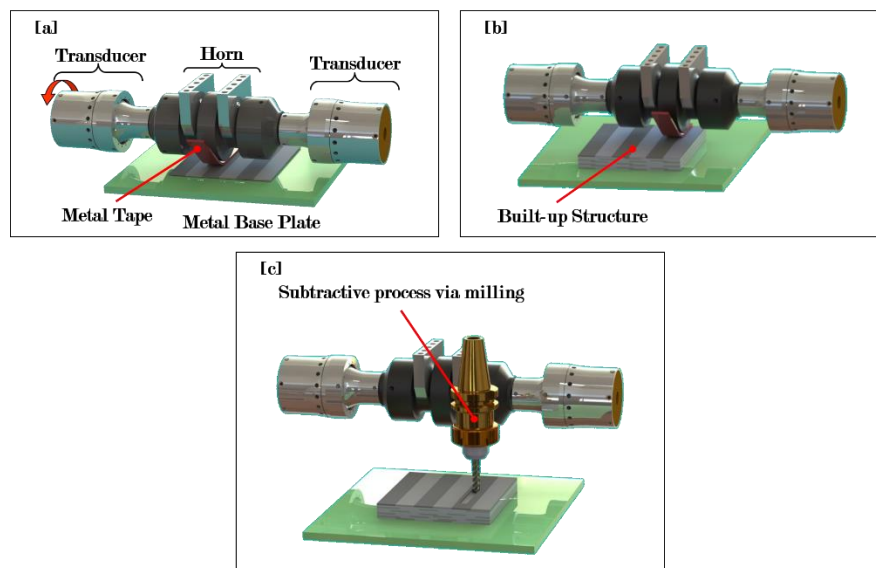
Ultrasonic additive manufacturing process. [a] Welding of first metal tape/foil layer to base plate by horn vibrating at ultrasonic frequencies, [b] building of structure by successively welding layers of metal foils, and [c] producing specific part geometries through the use of period machining operations. Renderings courtesy of Fabrisonic.
